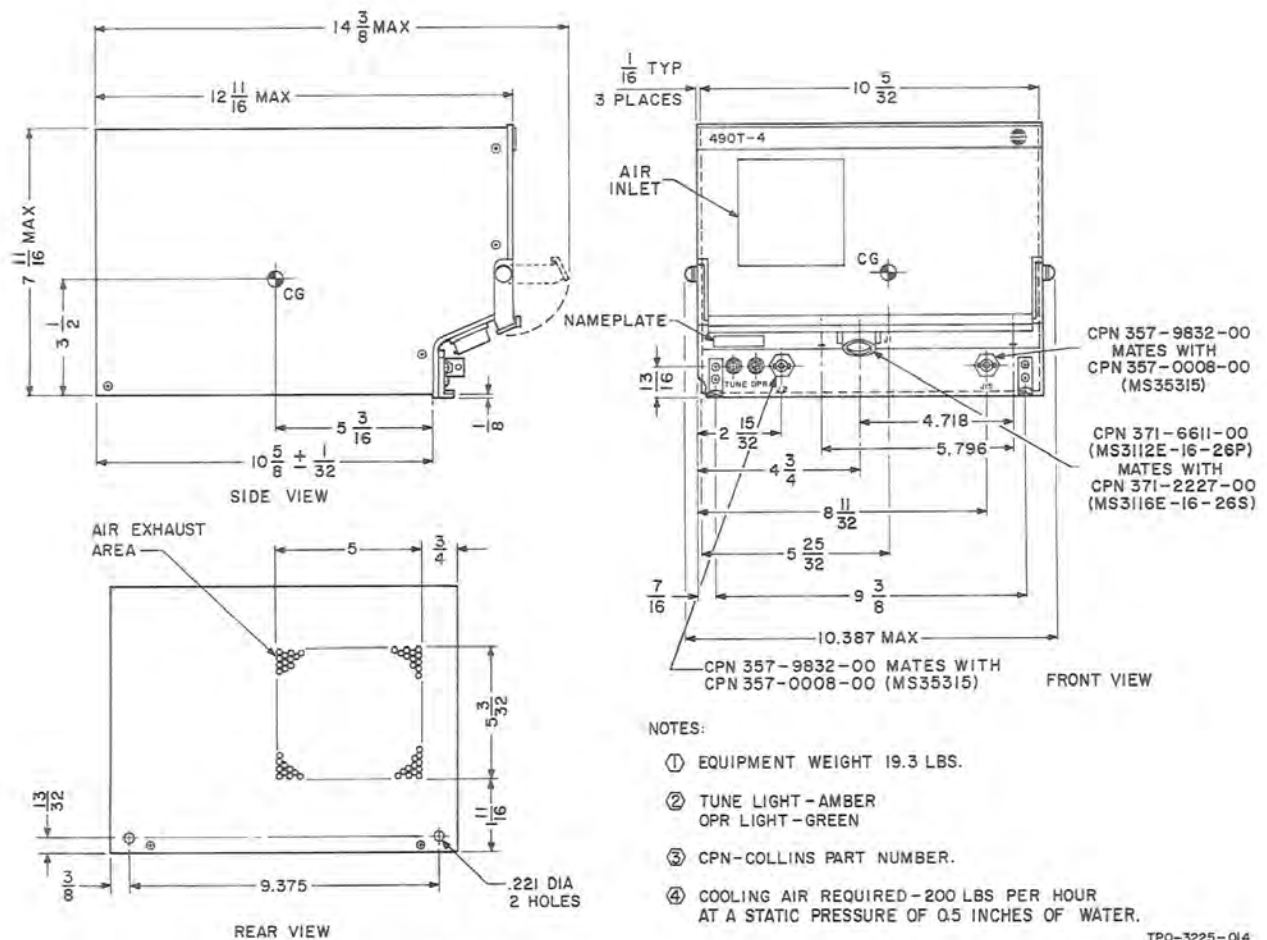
490T-4 Antenna Coupler Outline and Mounting Dimensions.
